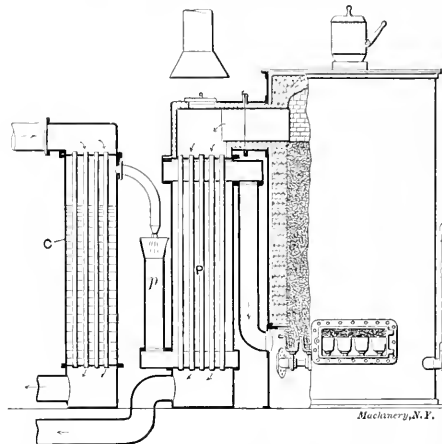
Producer for Utilizing Heat of Exhaust from Engine.
